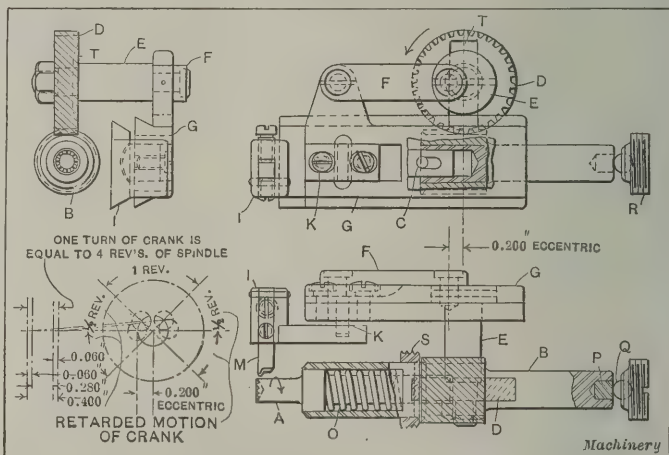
Diagram showing Operation of the Oil Groove Cutting Tool
